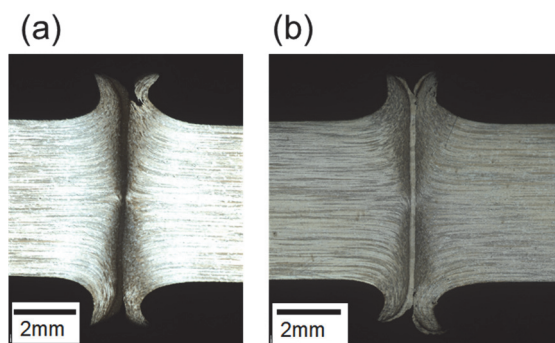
Macrostructure of the interface of the friction welded joints. (a) As-welded and (b) T6 heat treatment.
